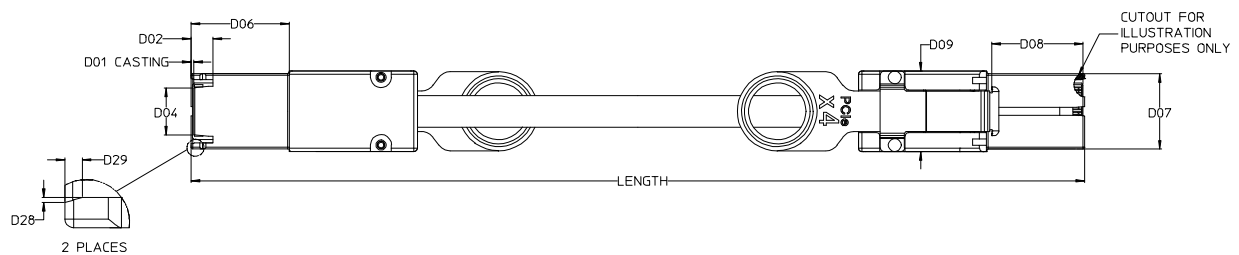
x4 Cable Assembly Top and Bottom Views
